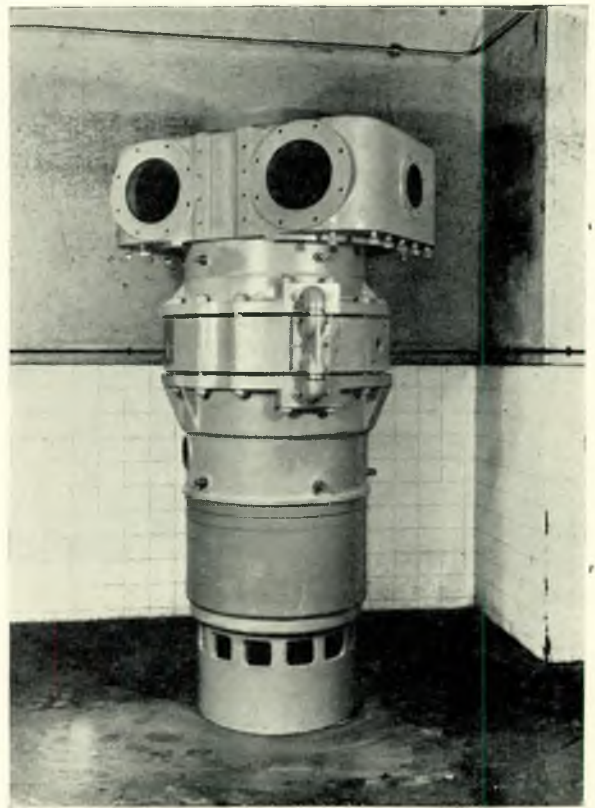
Cylinder liners, jackets, combustion chamber and exhaust belt assembly
